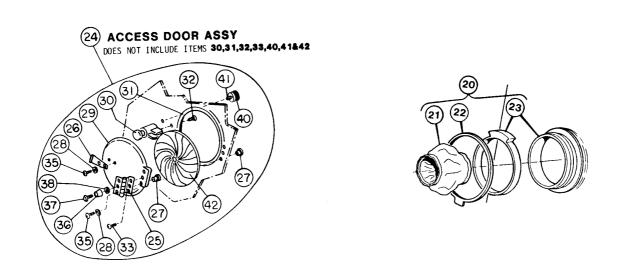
PARTS LOCATION DIAGRAM, HOOD ASSEMBLY
